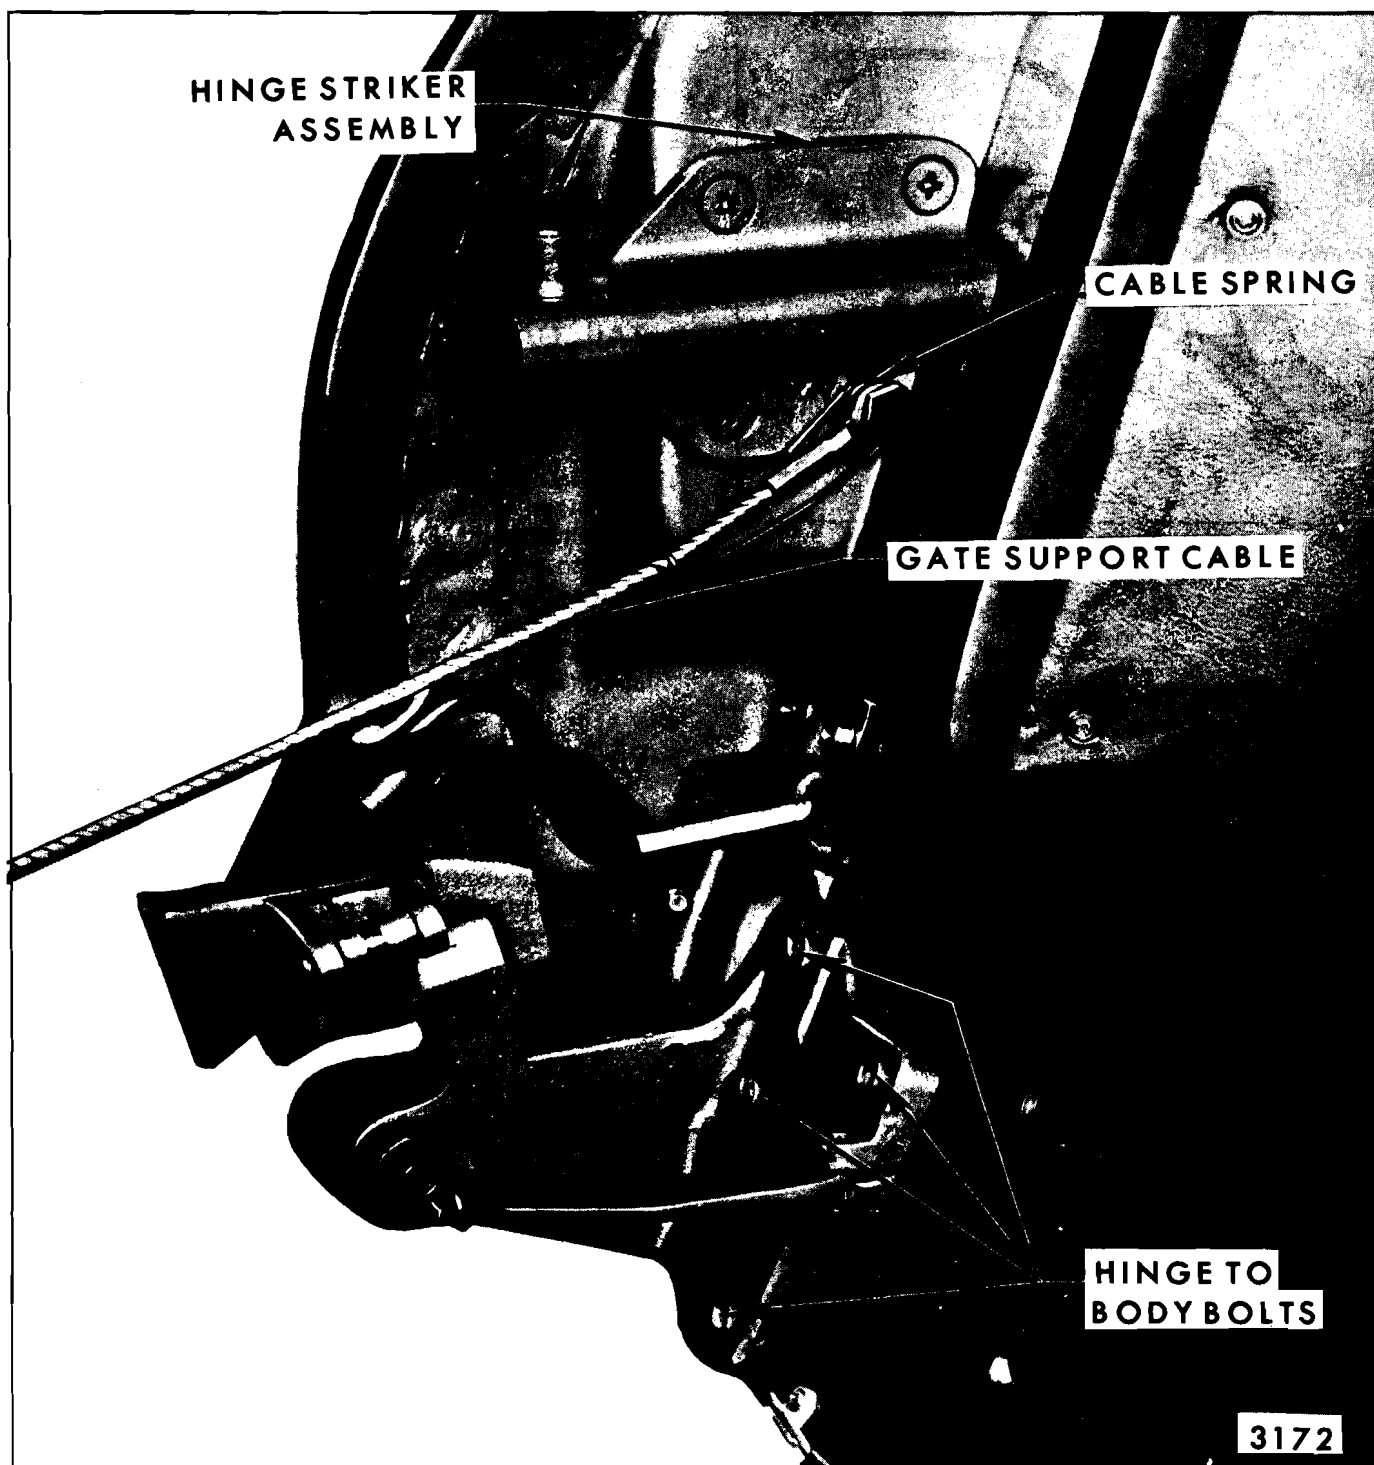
Tail Gate Adjustments - "B" Body Shown - "A" Body Typical
